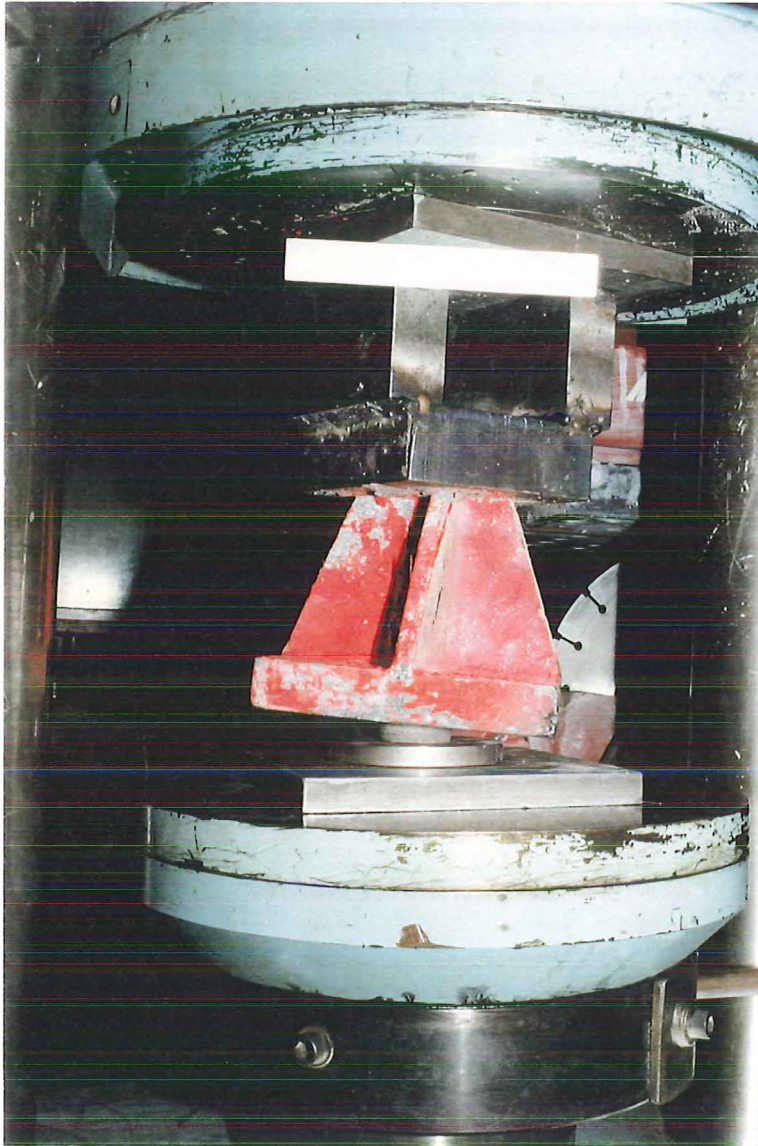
Linkage Bolt Dead End Welded Detail
